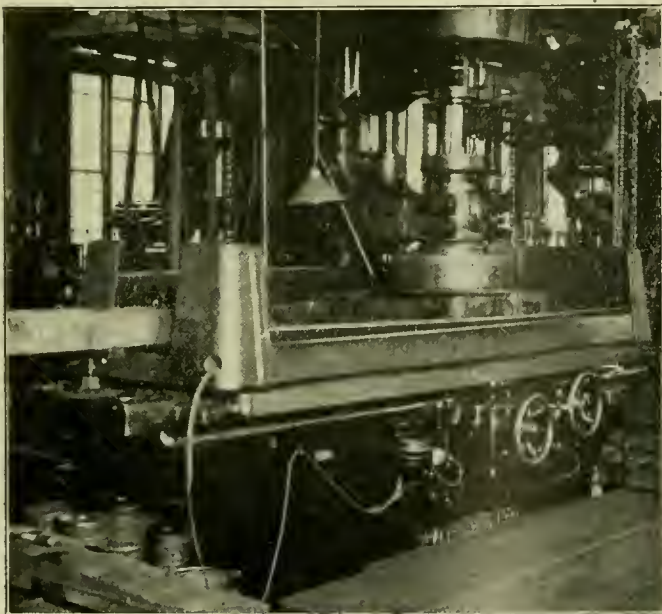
Surface Grinder Used in Finishing Main Rod Sides
